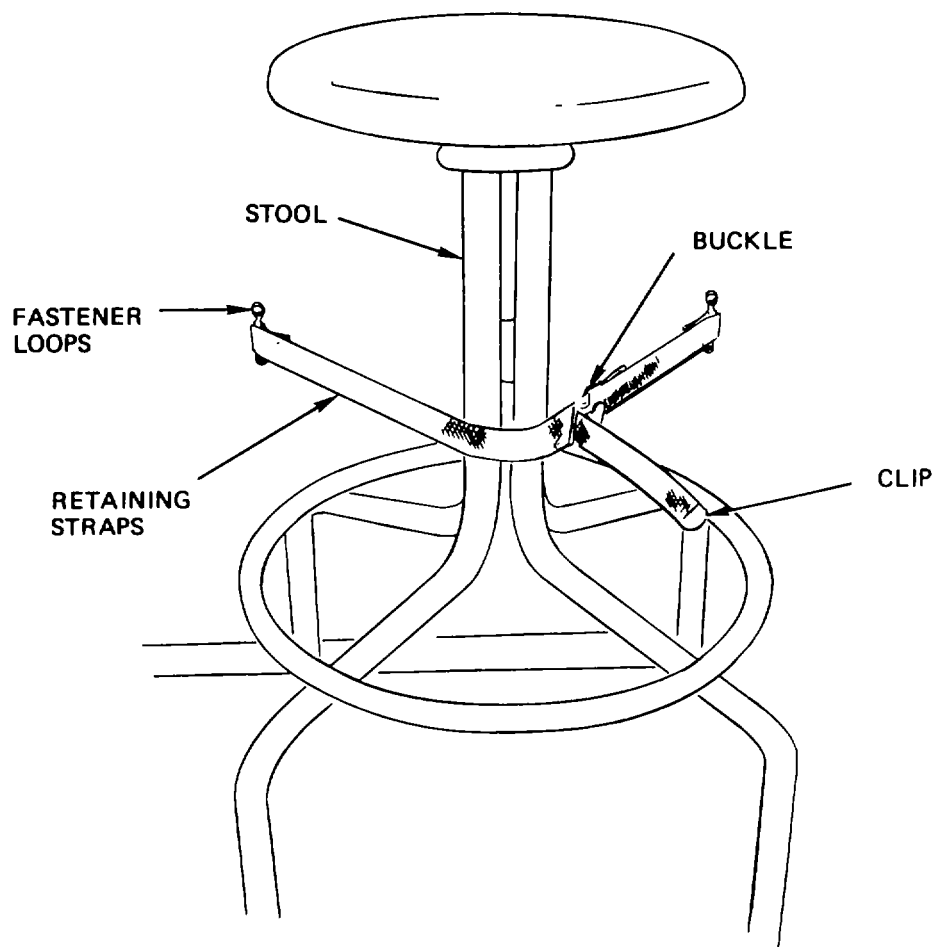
Stool Holddown Assembly, Removal and Installation.
